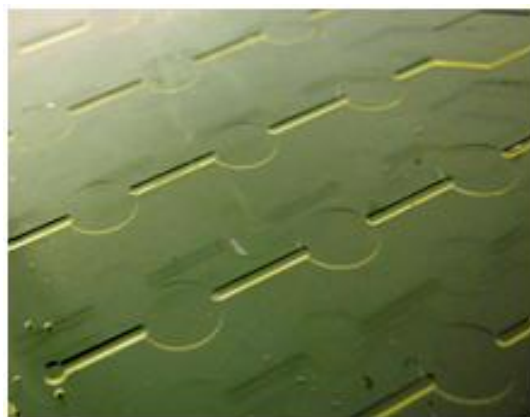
MD700 master mould with a LOC structures comprising channels, valves and chambers.
